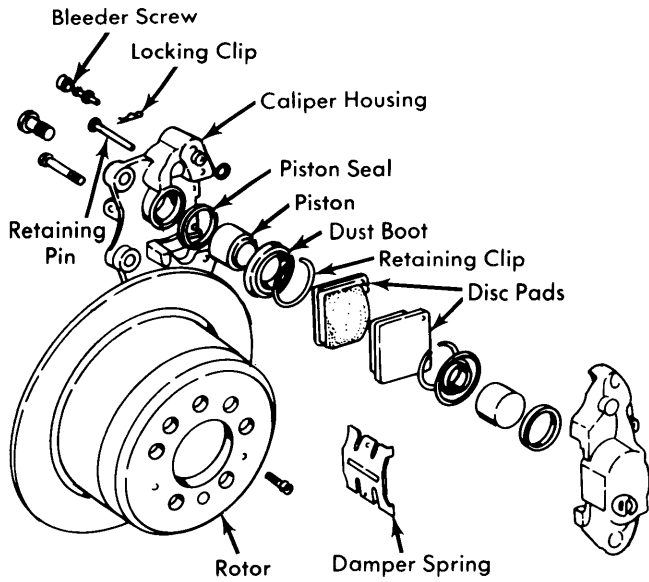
Components of Rear Caliper Assy. (240 Series Shown)
